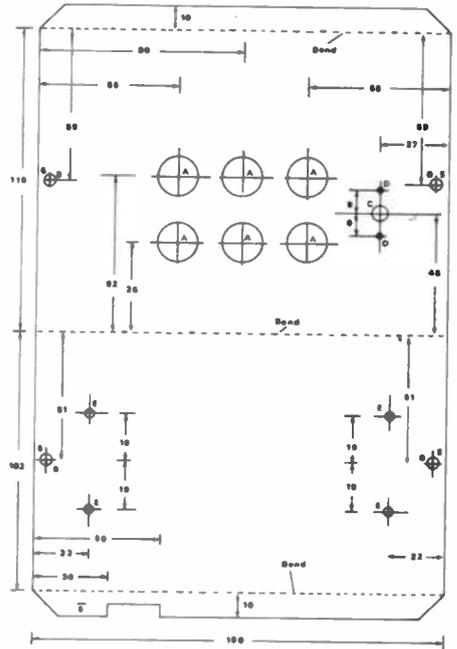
Dimensions of the back and bottom panels of the master oscillator box
